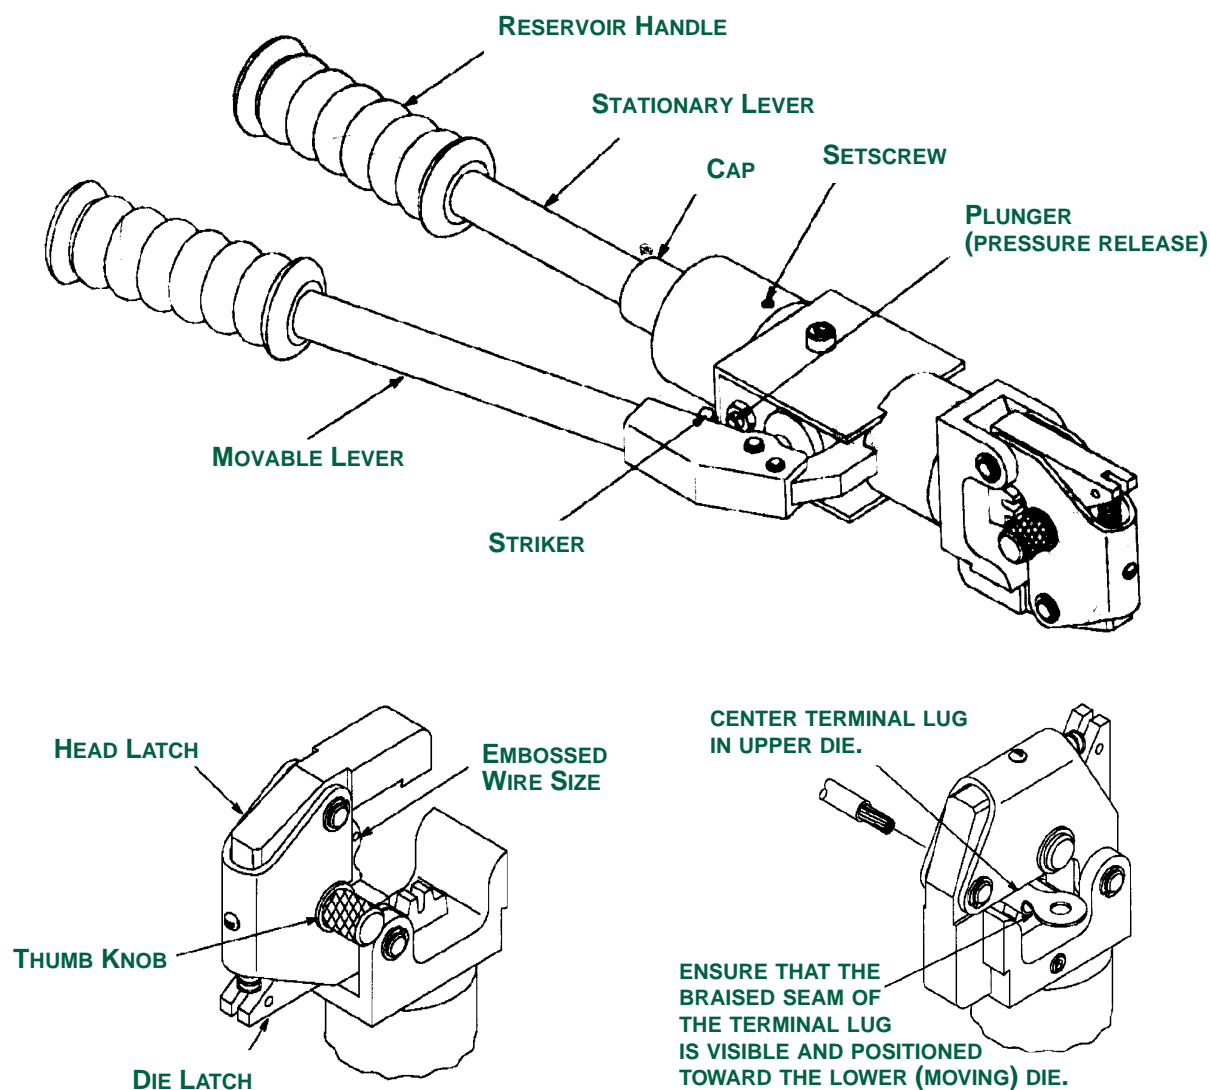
TE CONNECTIVITY 59974-1 HYDRAULIC CRIMPING TOOL
